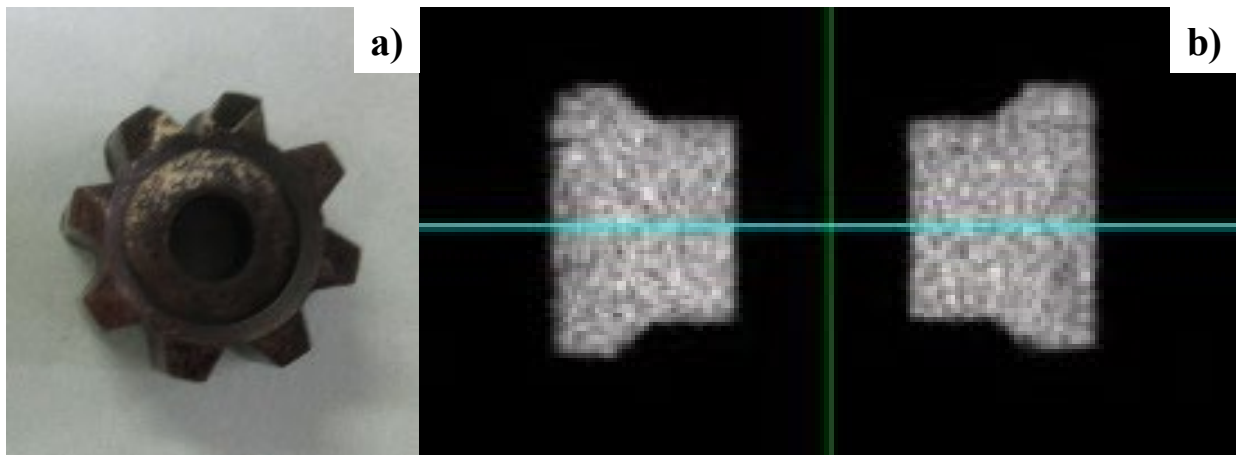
A sintered gear after hot forging at 668 K for 600 s by 2 kN. a) Overview of the sinter-forged product, and b) X-tomographic image on the sinter-forged product in Fig. 5a with three cross-sectional images.
